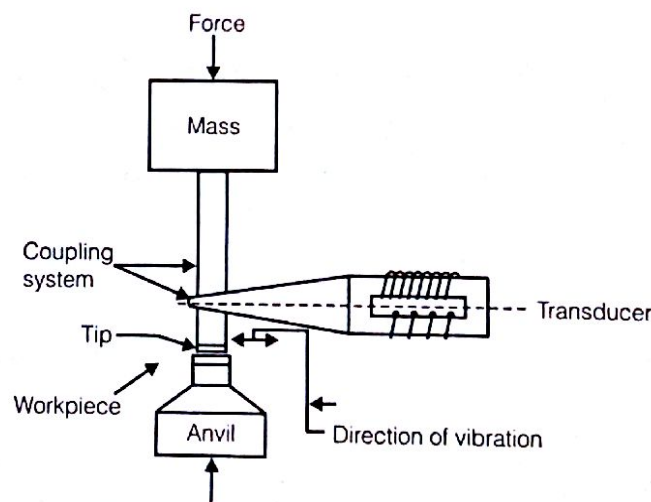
Components of Ultrasonic welding machine.
